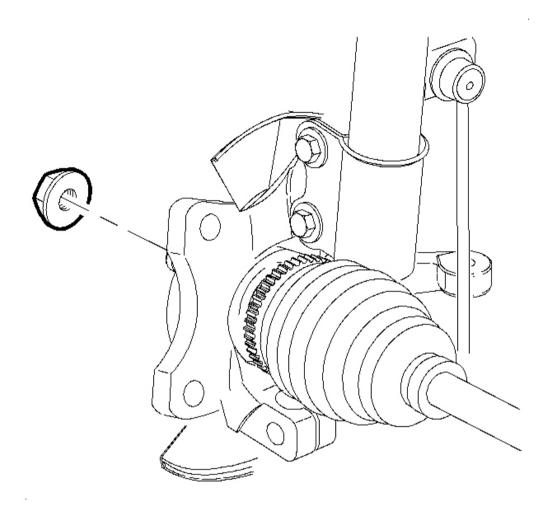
Front Wheel Drive Shaft Spindle & Nut Courtesy of GENERAL MOTORS CORP.
